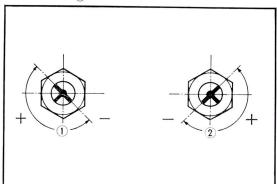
b (1) Adjusting range (2) Adjusting range
